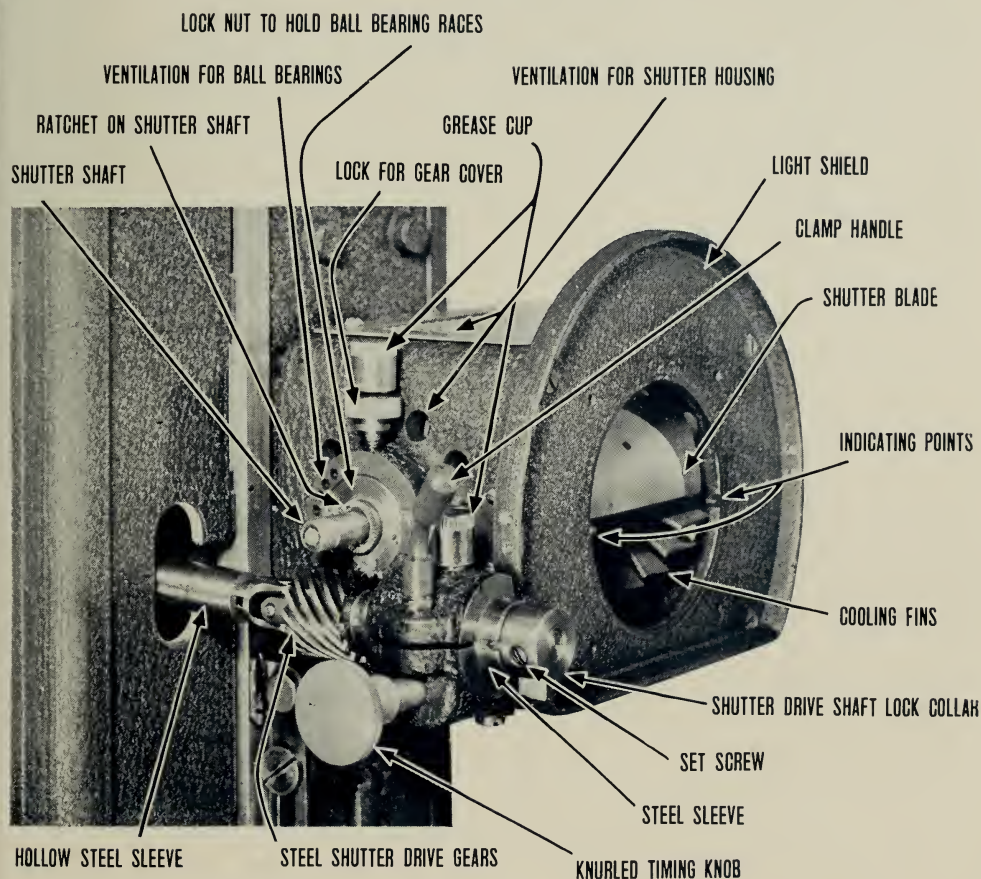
Shutter drive assembly, with gear cover and bakelite pinion gear removed
